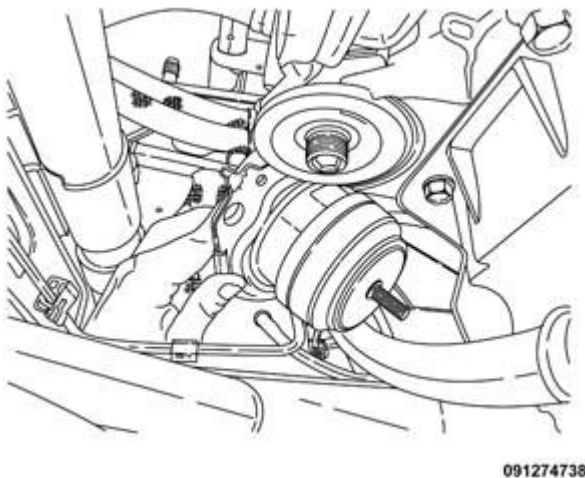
Removing & Installing Engine Mount Through Front Side Of Engine
